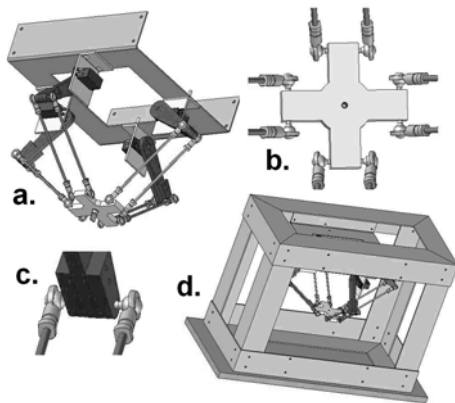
Assembly of all components resulting in the final structure: (a) All servos mounted with upper arm and lower arm attached to laser, (b) Lower arm attachment to laser end effector, (c) Articulated arm 'elbow' joint, (d) Complete Assembly
